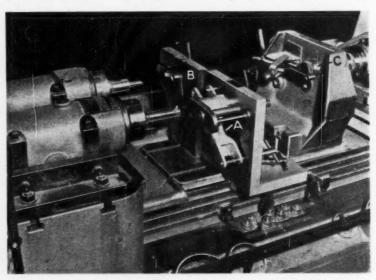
A Precimax 3-spindle Fine-boring Machine Equipped with Three Work Holding Fixtures
